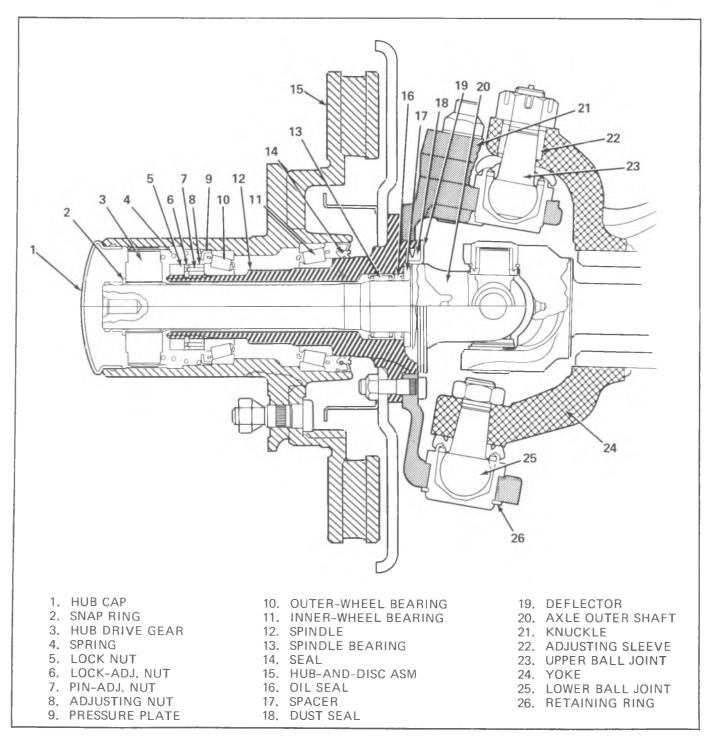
C-1K--K10, K20 with Locked Hub and Ball Joints
